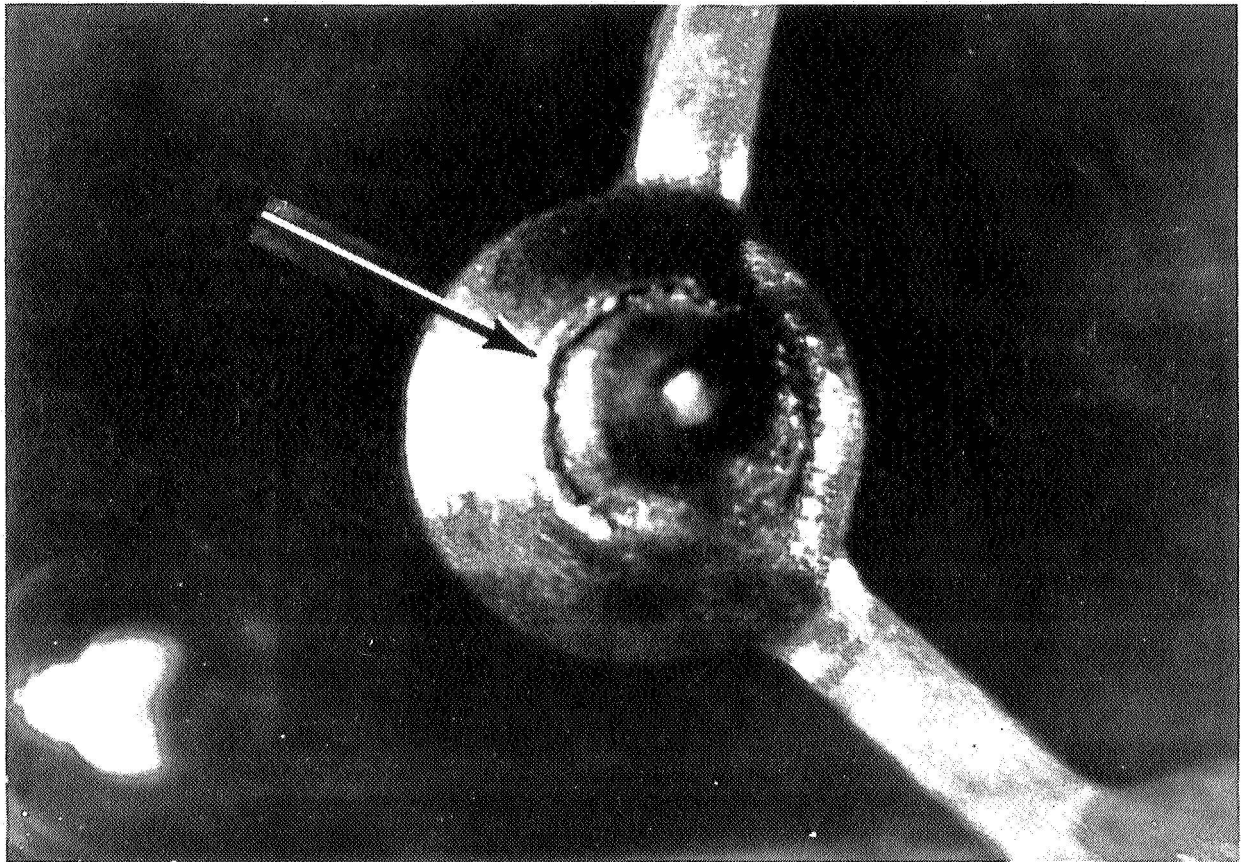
CRACKING OF A STRESSED JOINT ON
